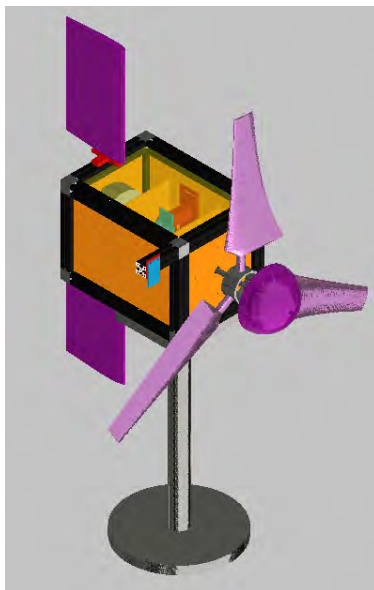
CAD of the wind turbine assembly in Autodesk Inventor 2021
